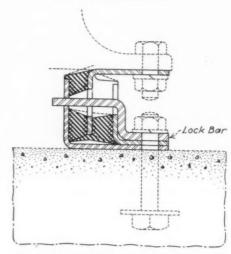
CROSS SECTION THROUGH THE SHEAR MOUNTING SHOWN IN FIG. 7
